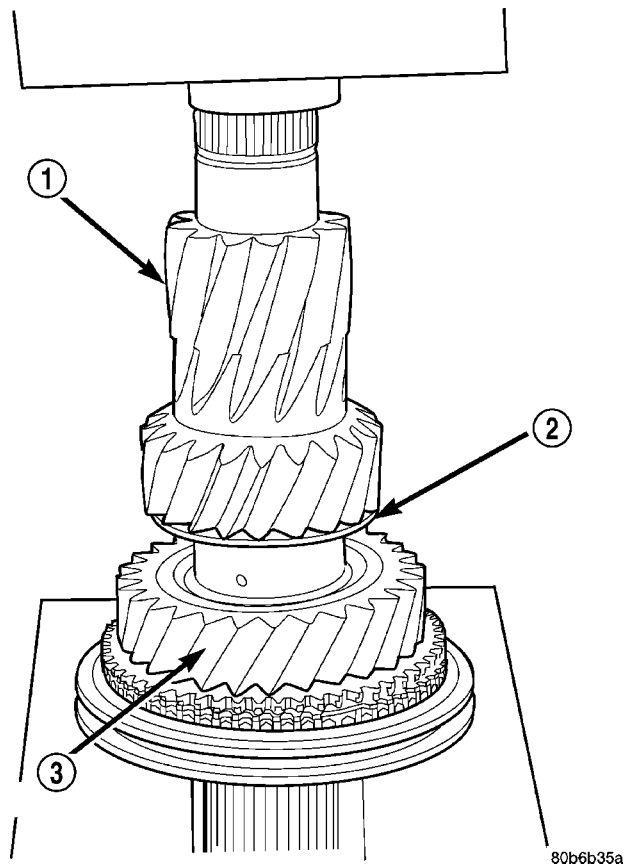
3-4 SYNCHRO ASSEMBLY
